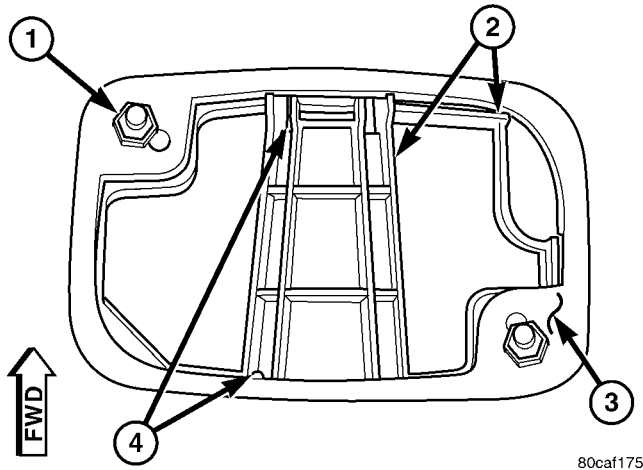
Intrusion Transceiver Module Mounting Bracket
